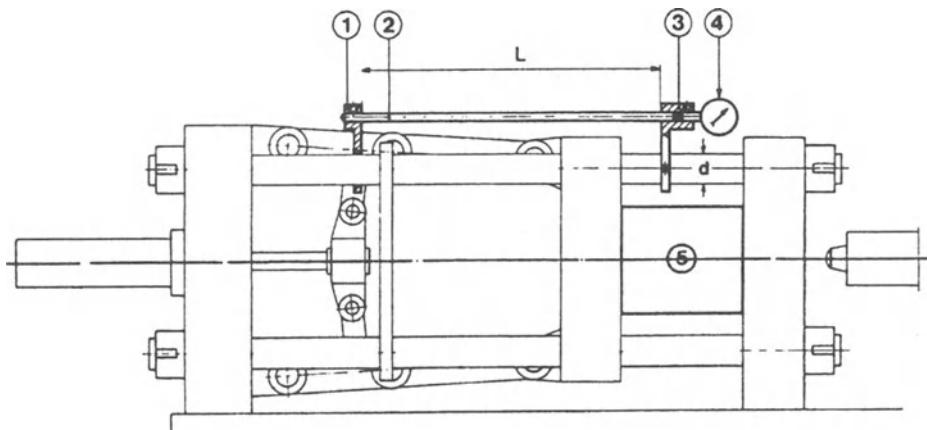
Mechanical device for measuring clamping force: (1) left-hand support, (2) rod, (3) right-hand support, (4) dial gauge, and (5) mold.
